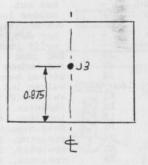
KIV-I HOLE DRILLING GUIDE (EXTERIOR VIEWS -- DIMENSIONS IN INCHES)
